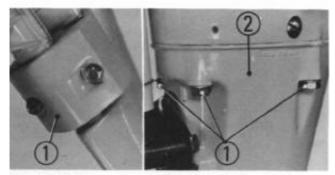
① Lower mount Fig. 2-4 ① 8 mm bolts housing
